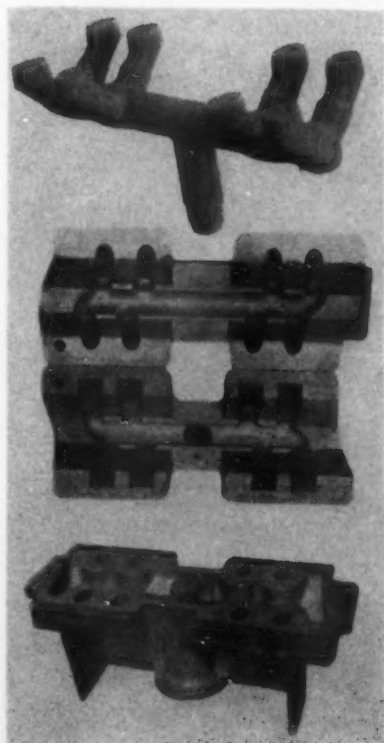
AUTOMOTIVE MANIFOLD CORE WITH CORE BOX.
